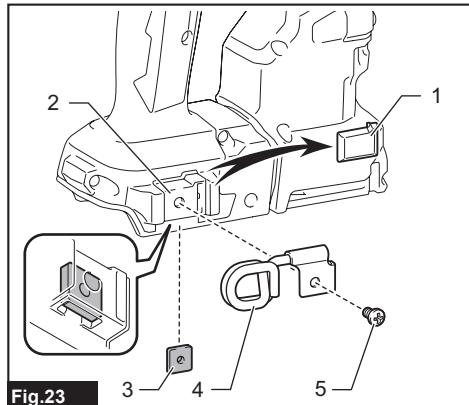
▶ 1. Rubber cap 2. Mounting bracket 3. Square nut
